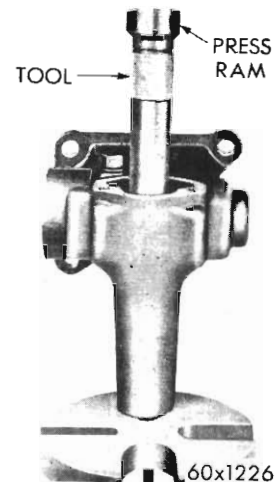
Pressing inner bearing into housing (Tool E19C20)
